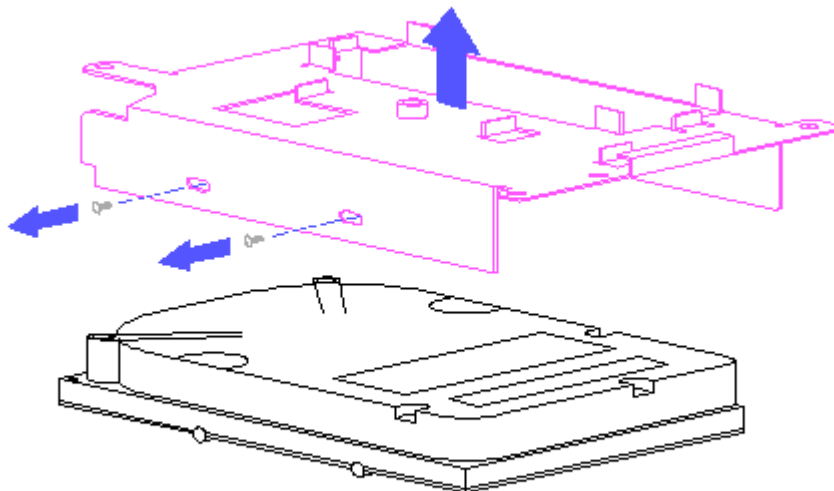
Removing the Hard Drive from the Hard Drive Bracket
